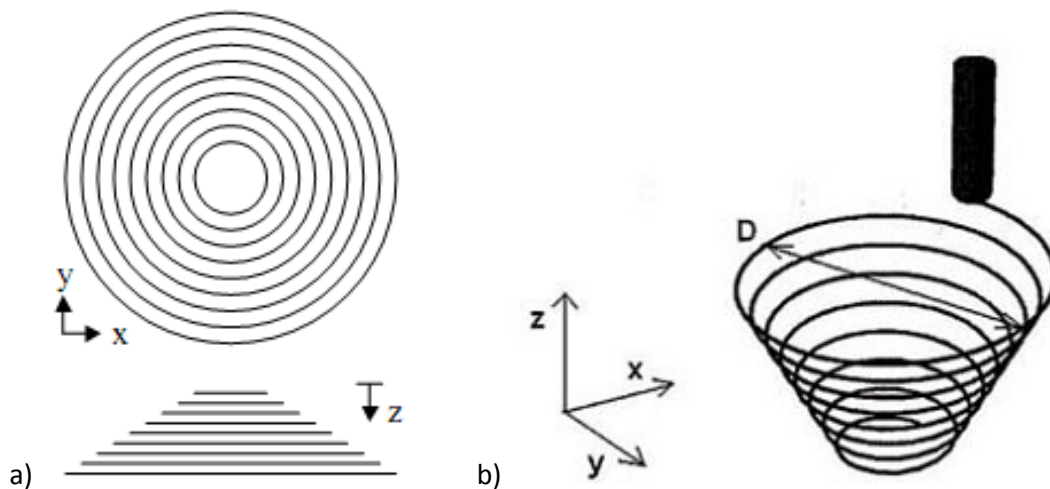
a) Spiral tool-path, b) Helical tool-path
